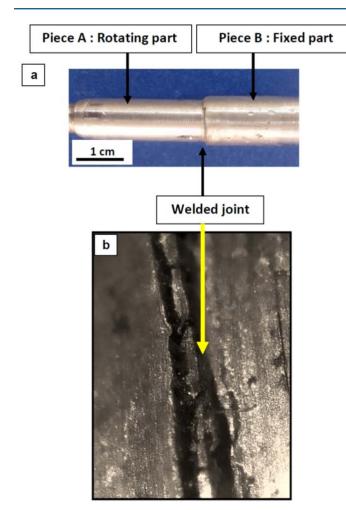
Rotary Friction Welding of Aluminum to Alumin(A) Welded Sample and (B) Magnification of the Welded Joint.
